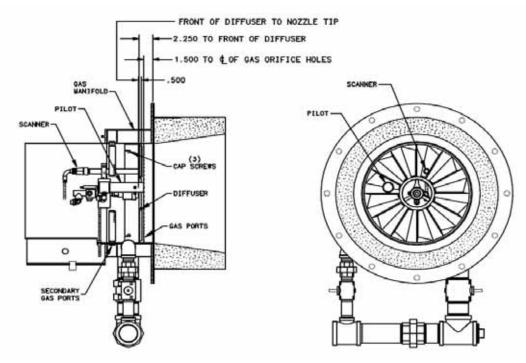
Firing Head Assembly: Dual Manifold
